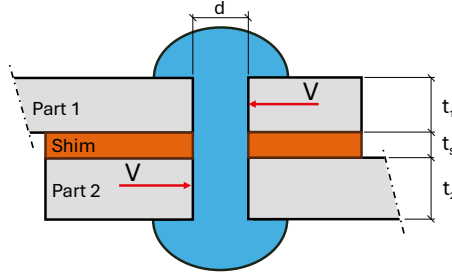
Single-shear shimmed joint representation with shear load acting on fastener
